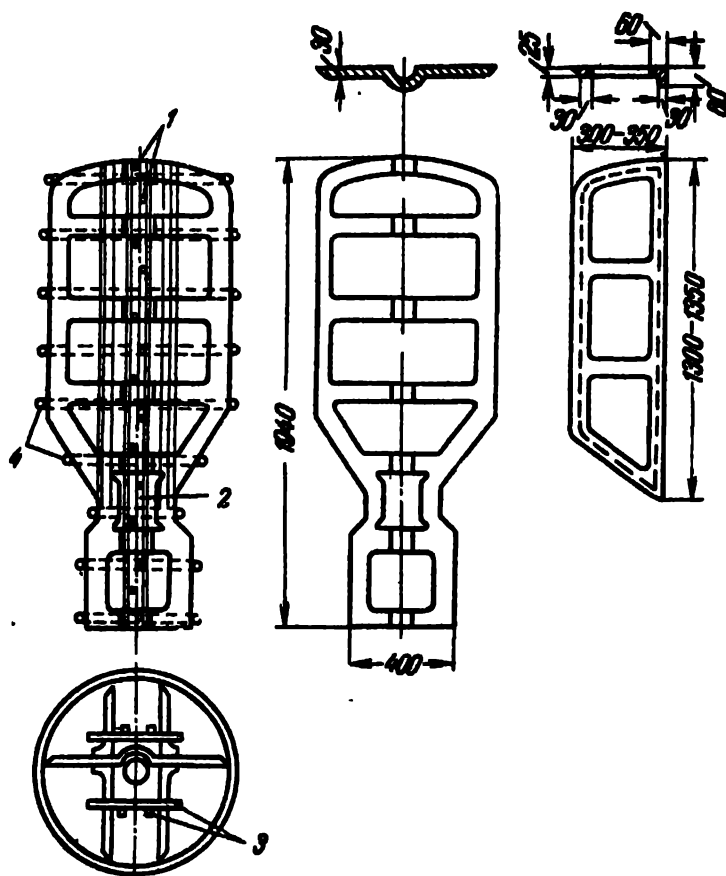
Grid of the core for casting a ram (Vasilyev, Chepel):
